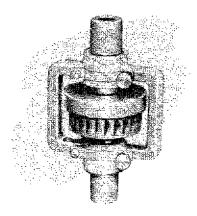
ROTOR IN FIXTURE T-22496 READY FOR THE DYNAMIC BALANCE
